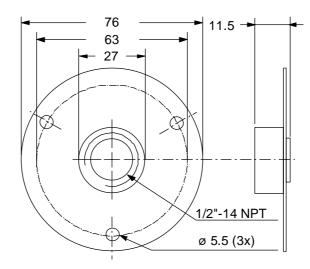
Duct flange to be used with closed-tank connector FTG13A600R. Order number T752-1001
